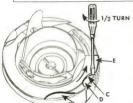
View from Last End, Showing Position of Bobbin Case and Hook Ring for Removal from Machine
